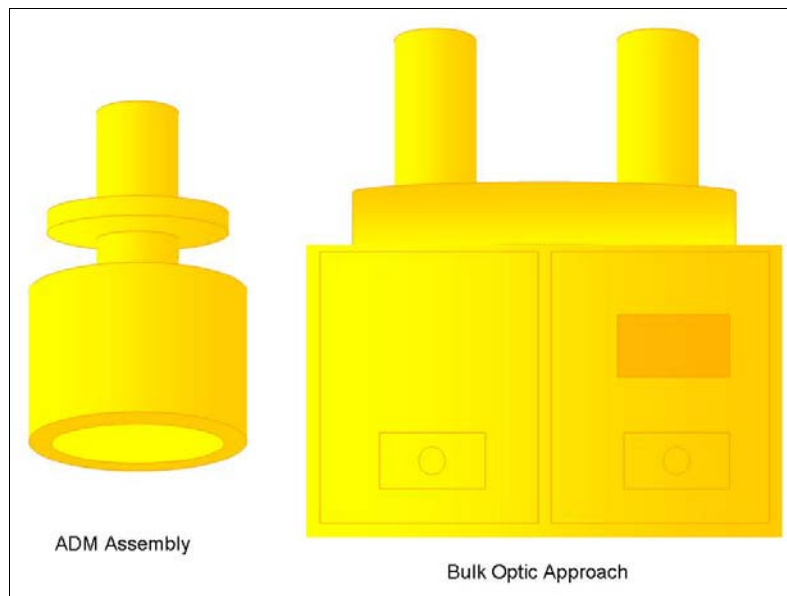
Plastic molded piece parts for coupling to multi-mode fiber
